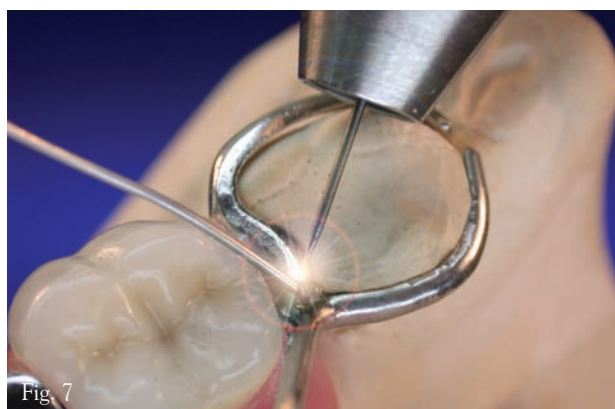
For the welding some wire in chrome-cobalt without carbon is always used.
